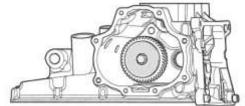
Installing Main Drive Gear Bearing (Typical)
